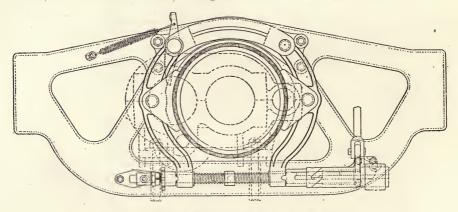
Pierce-Arrow Propeller Shaft Brake.
